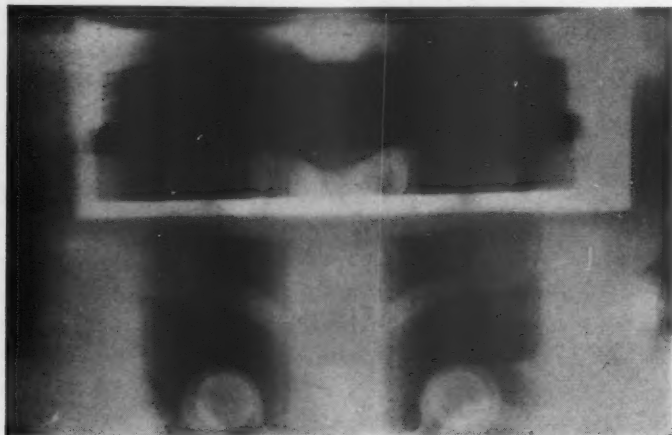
RADIOGRAPH OF SOUND CASTING.
